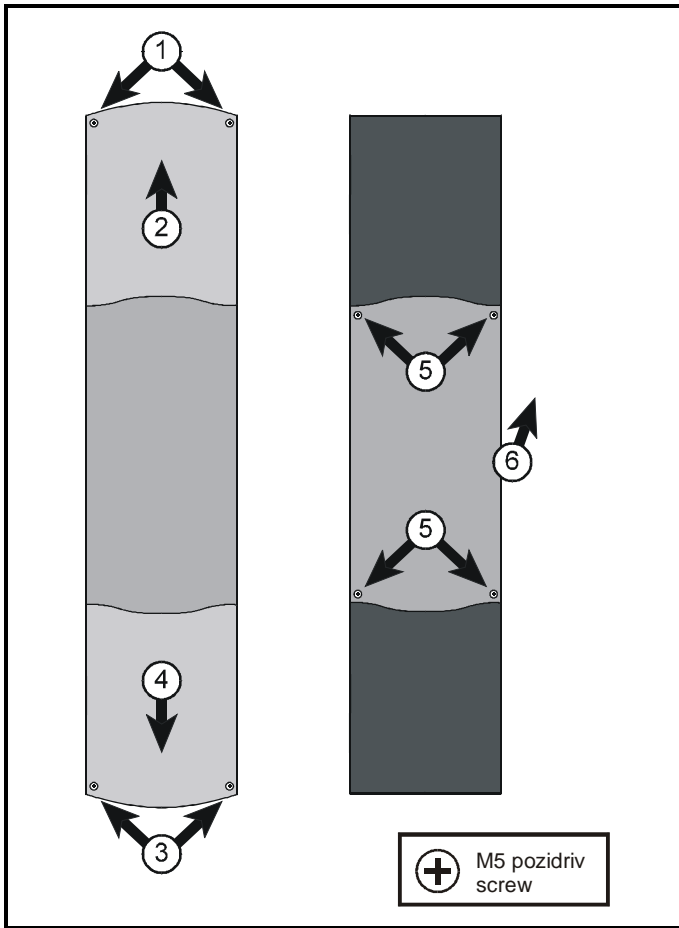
View from the underside showing how a terminal cover is removed from the drive
